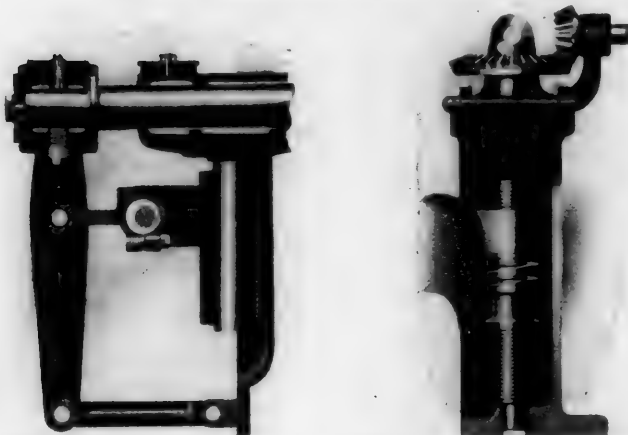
SECTIONAL VIEW OF OSCILLATOR.
